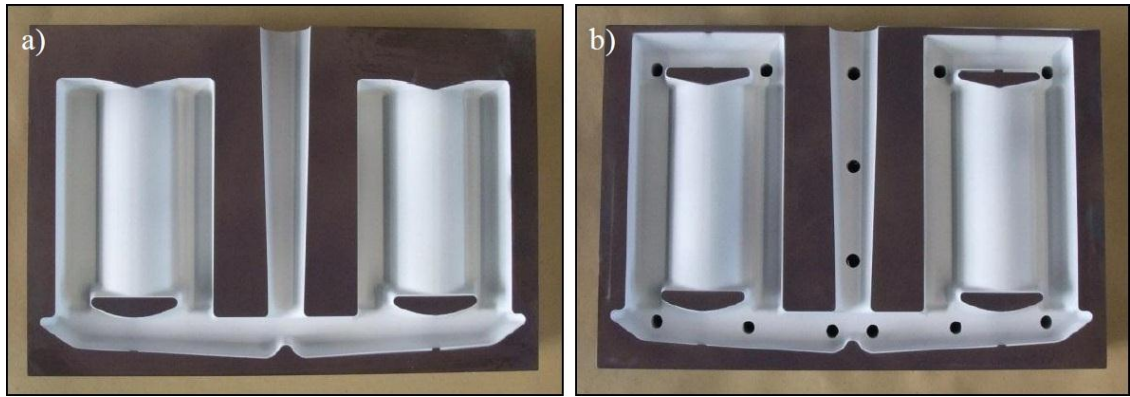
Bolt die parts: fast/fixed (a), moveable (b)
